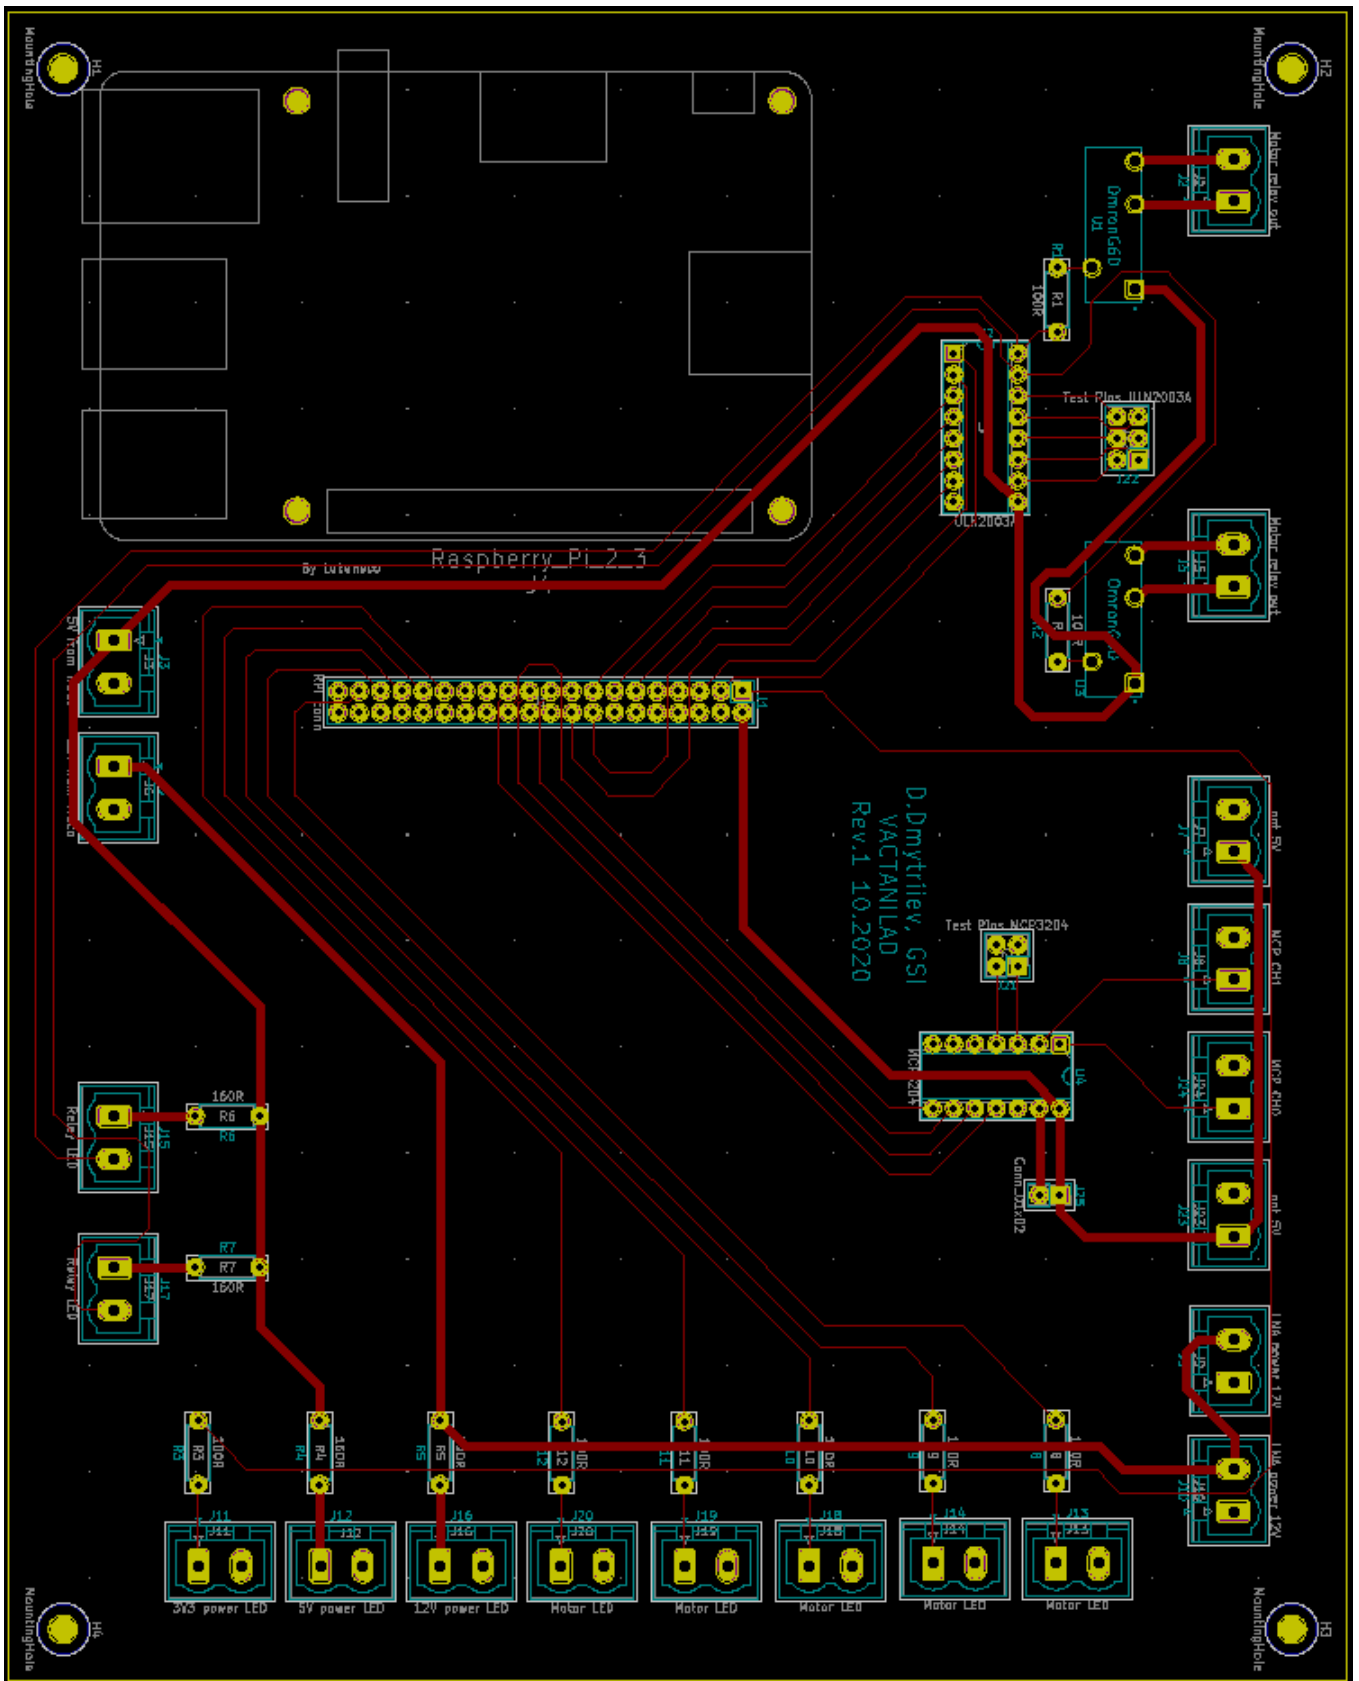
PCB designer scheme of the PCB for DAQ and control systems
